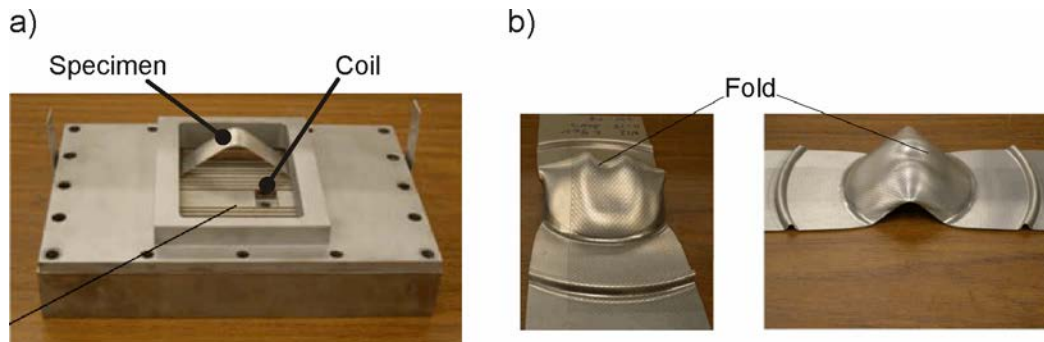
a) Straight coil windings laying under the specimen b) The specimen after being formed with a straight coil [2]
